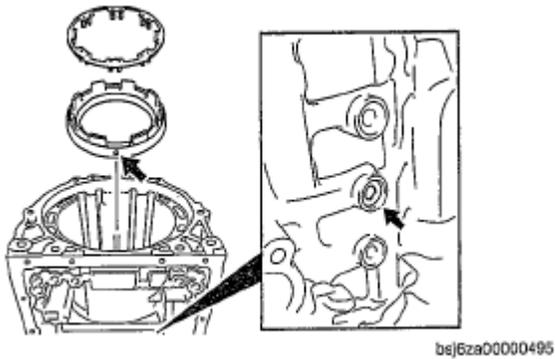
Positions For Installing B1 Brake Piston Component And Return Spring
